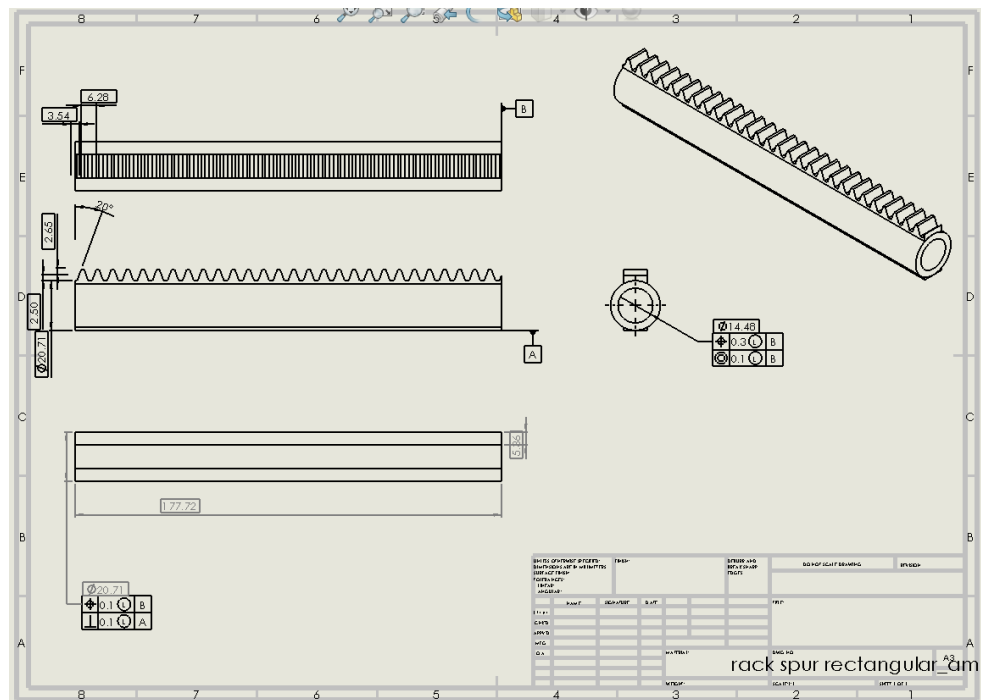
Engineering Drawing of SCARA Rack (millimeter precision)
